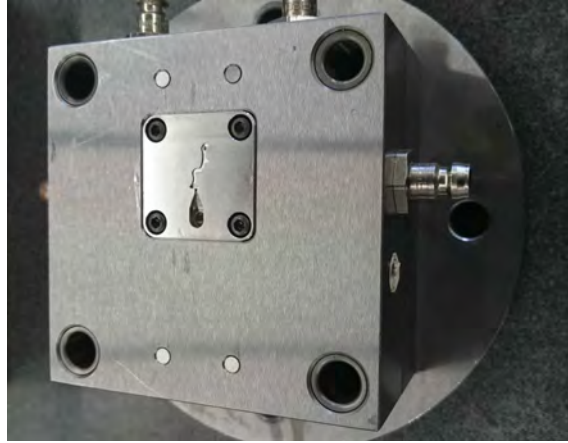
Realized mold (movable half) with mounted insert made by SLS.
